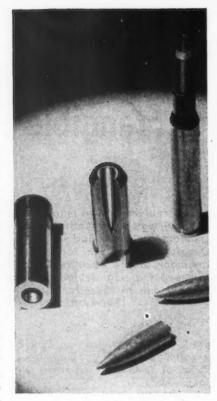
Plastic molded bullet and completed round used in training aircraft gunners. Cutaway shows section of hobbed die.
